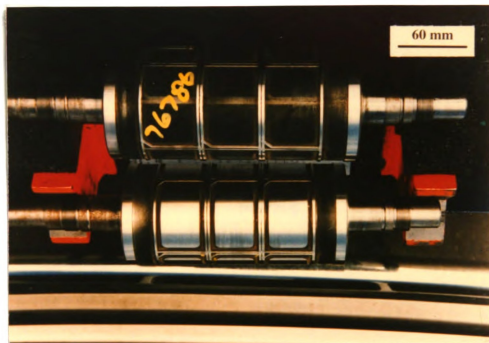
A view of hard-facing tracks, with complex geometric patterns, deposited on a steel roller by laser cladding after surface grinding (sample B).
